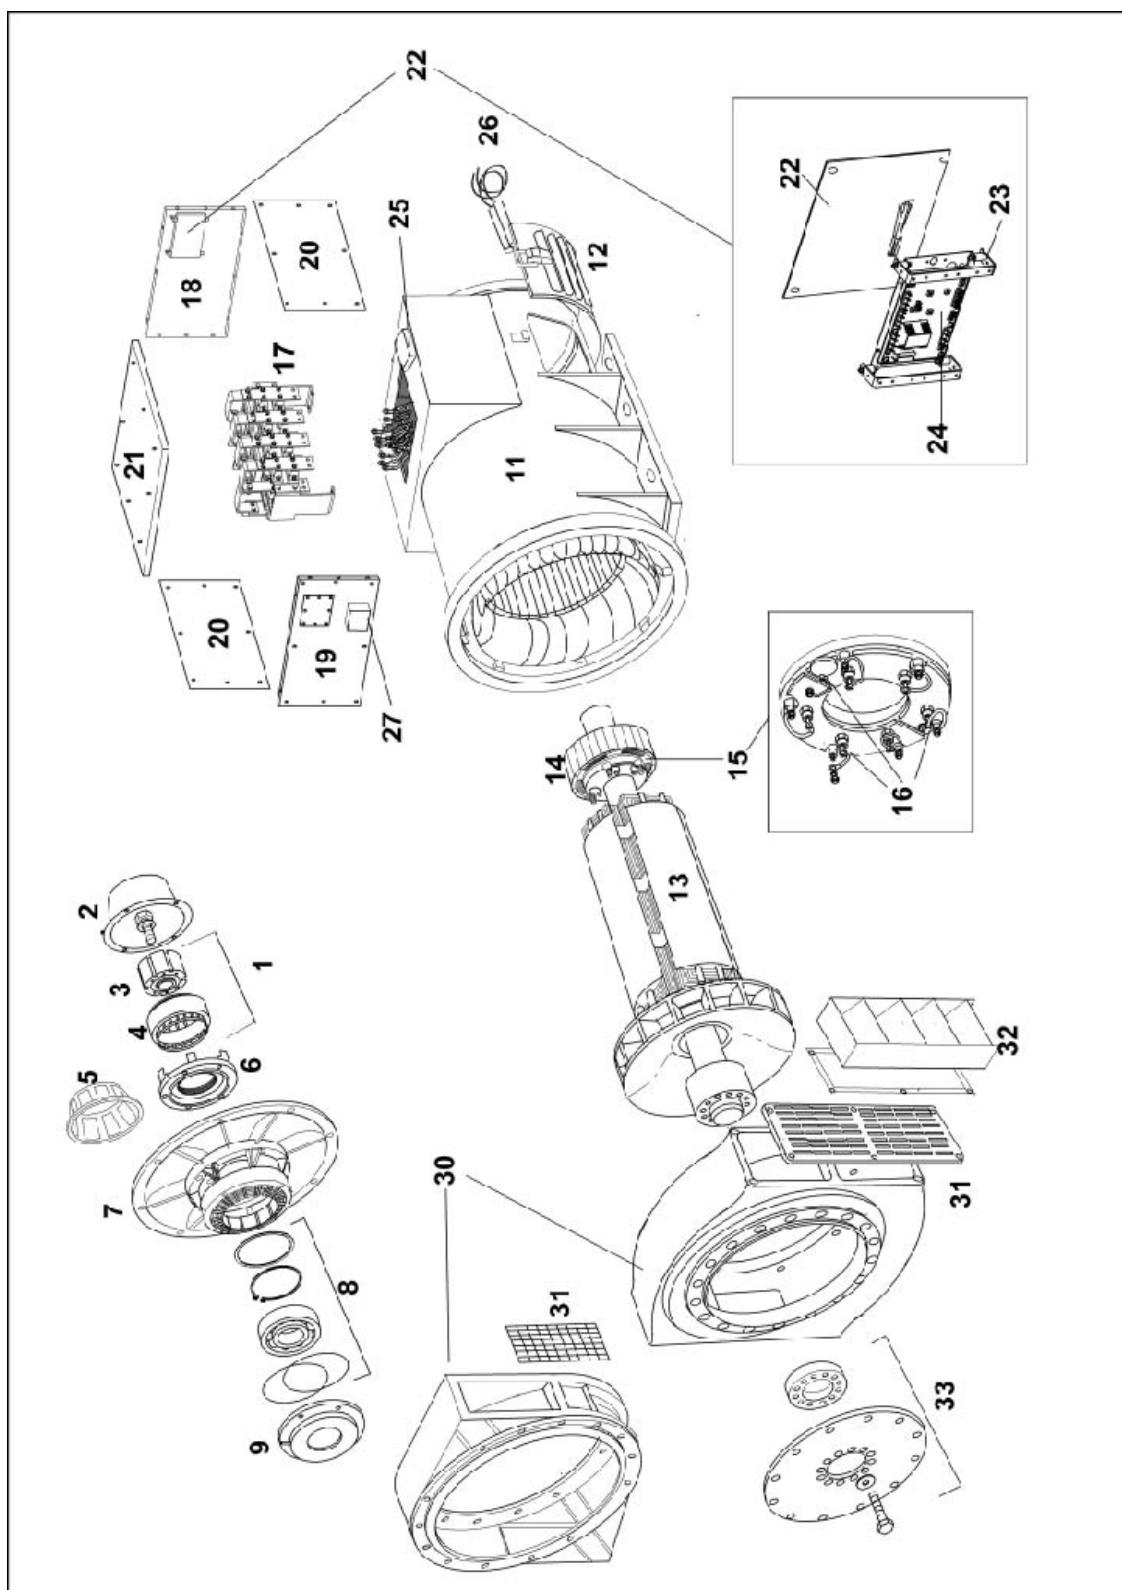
HC6 SINGLE BEARING ALTERNATOR
